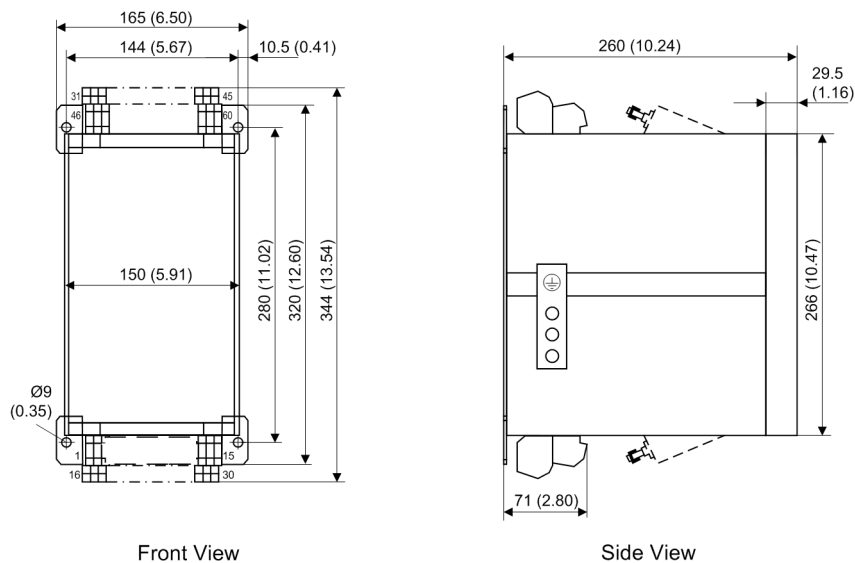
Dimensional drawing of a 7SJ62 or 7SJ64 for panel flush mounting (housing size $\frac{1}{3}$)
